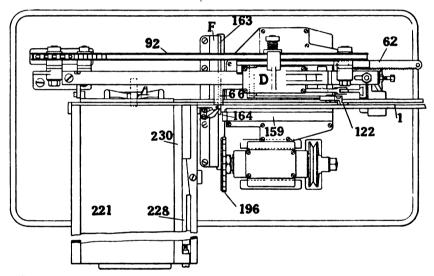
(Fig. I. in patent abridgment.) Grant-Legros-Maw line-justifying machine. Plan.
